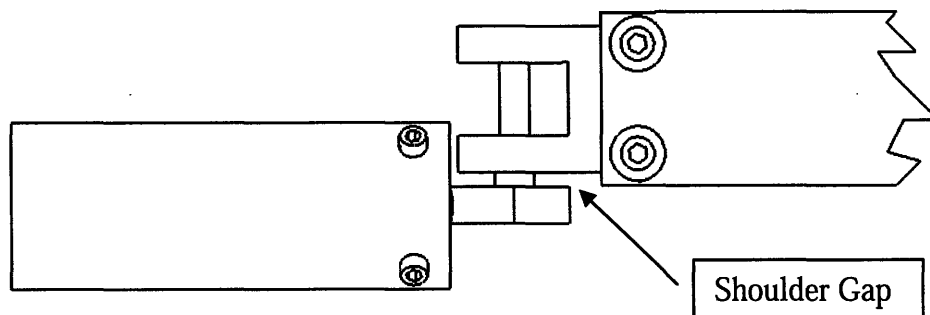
A side view of the gripper: the shouldered rod keeps two surfaces from making contact.
